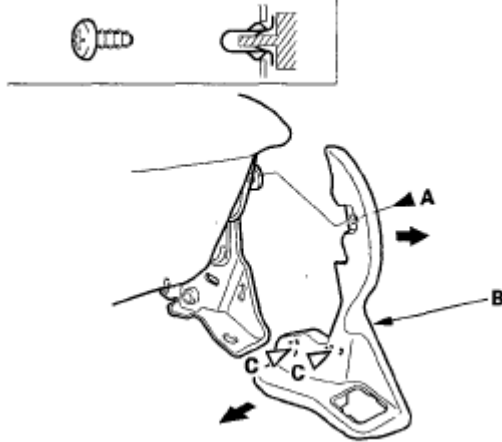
Identifying ISO-FIX Bracket Inner Cover And Clips
